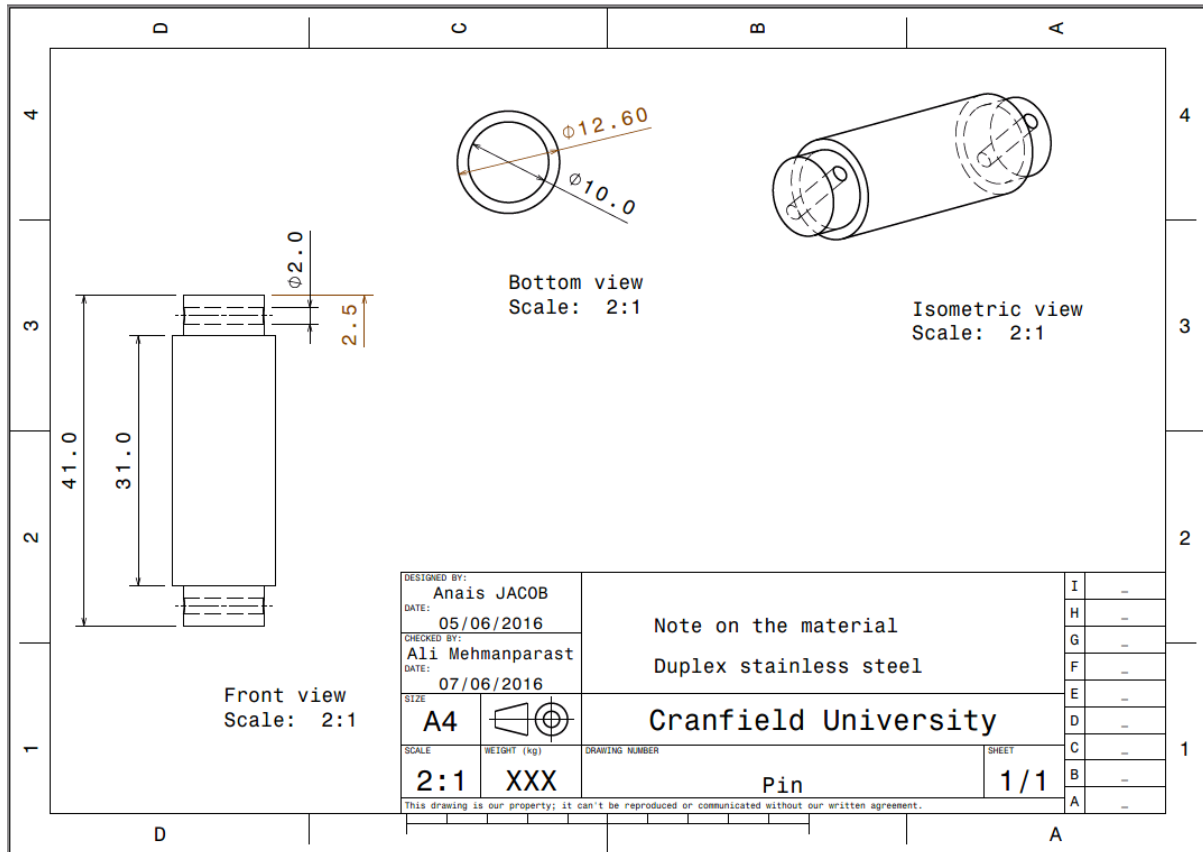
Technical drawing of the pins manufactured for the FCG tests
